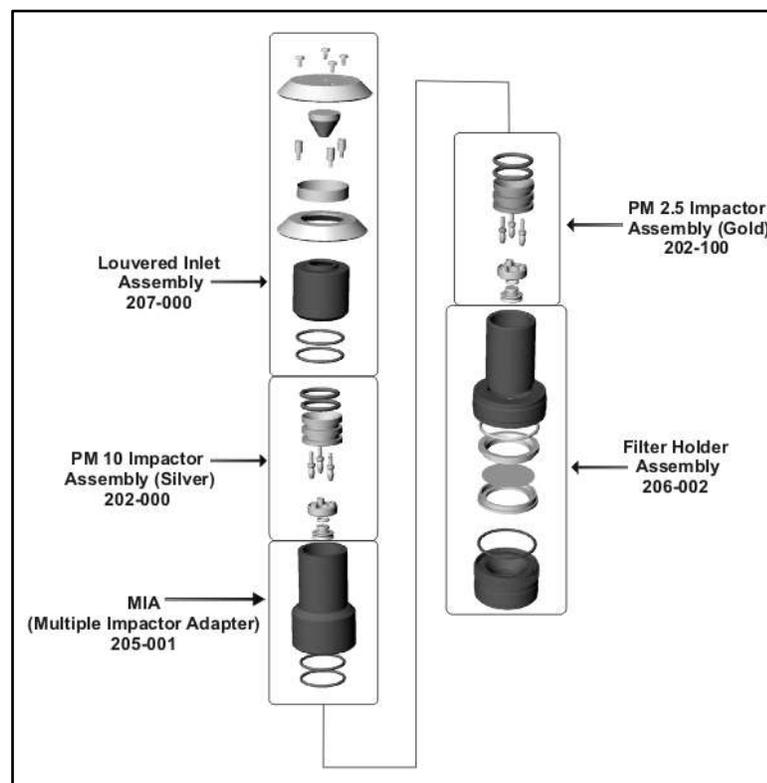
PM2.5 Impactor/Filter Holder Assembly
